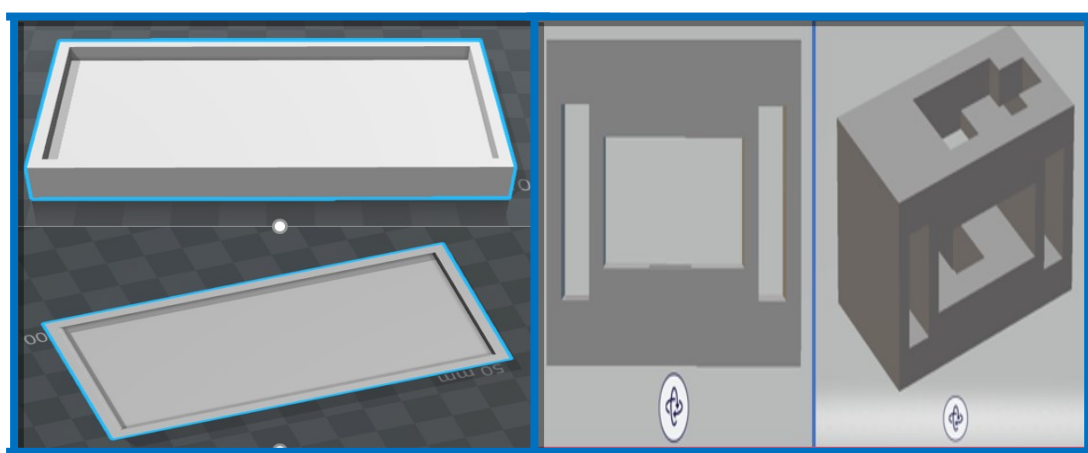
(a) Design of casing for molding and casting of composite film (b) Design of LED-LDR assembly package.
